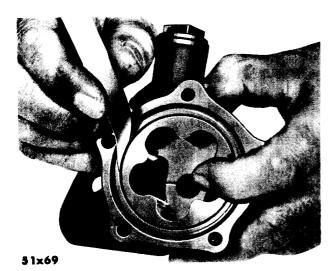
Measuring Clearance Between Rotor Body and Pump Body
